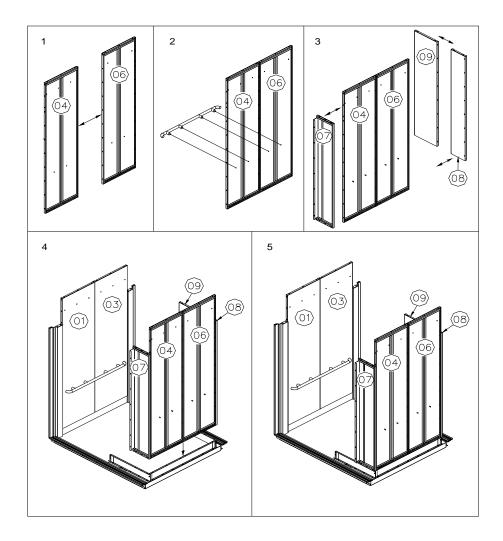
B. CAR PANEL(RIGHT and REAR SIDE) ASSEMBLY (FRONT and REAR ENTRANCE)
